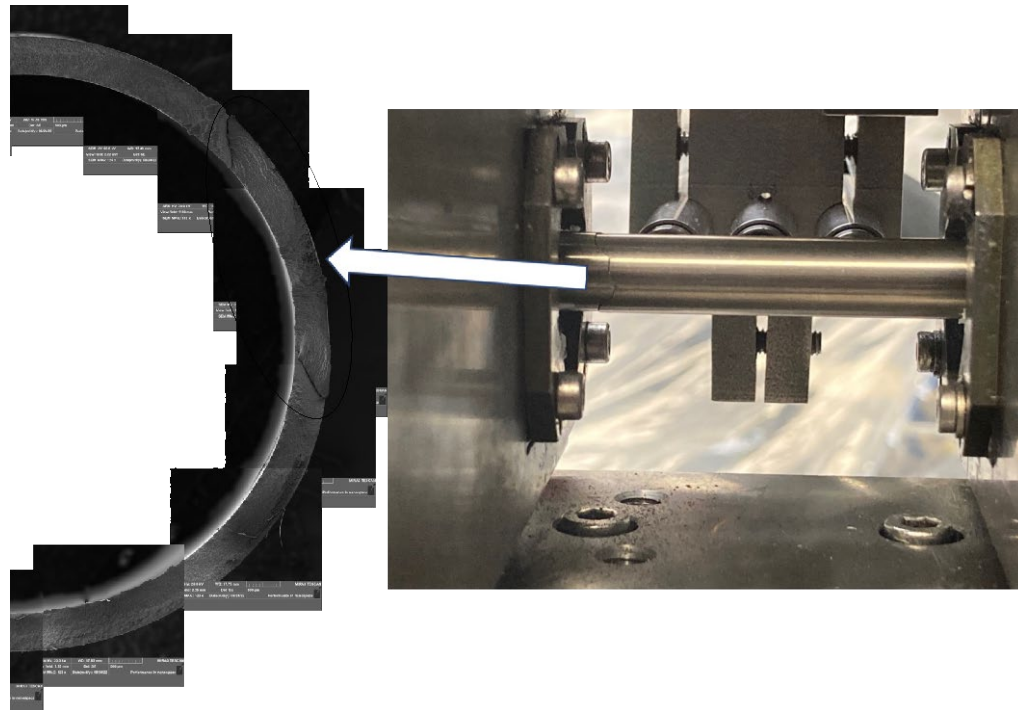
Top (fracture) view and side view of the fatigue failure region in Q2 and Q3 of sample Zirc-4-W-4.
